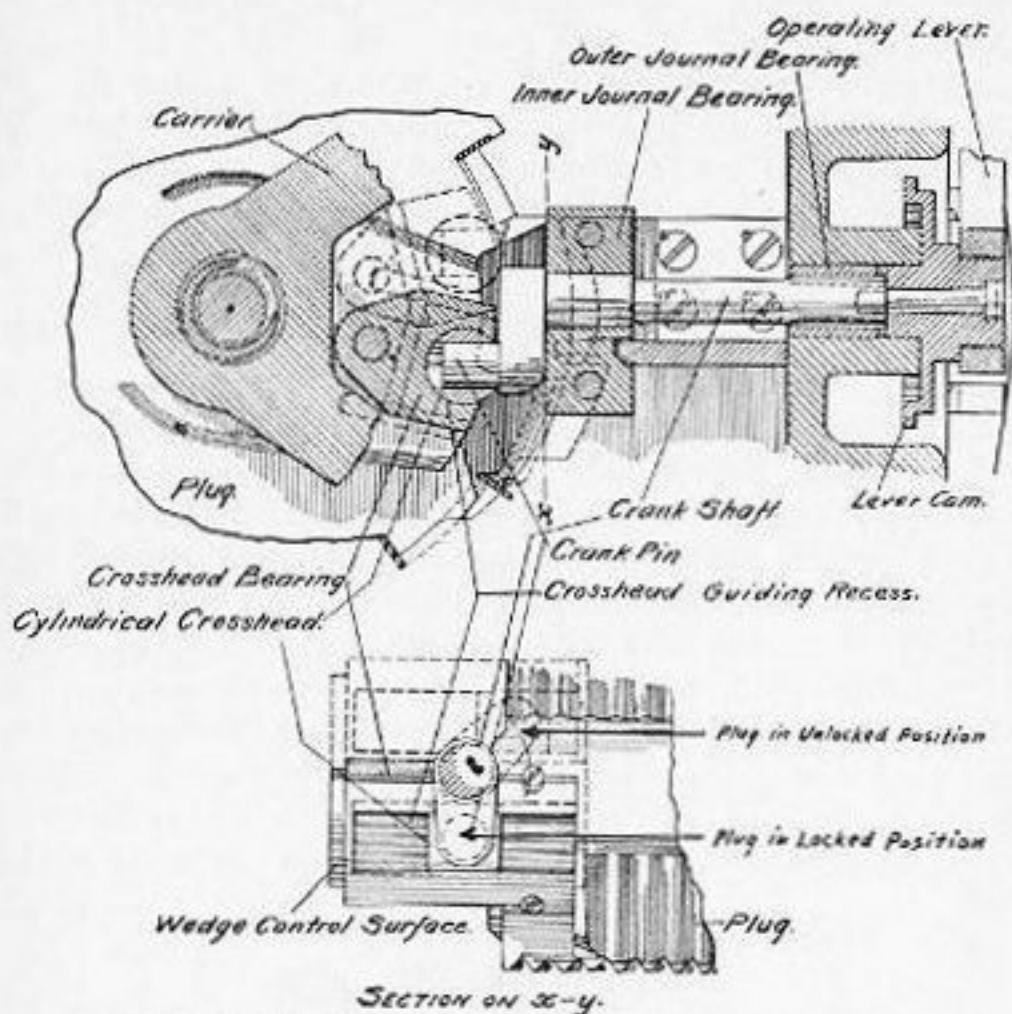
OPERATING MECHANISM FOR 5-INCH BREECH MECHANISM, MARK VII.
